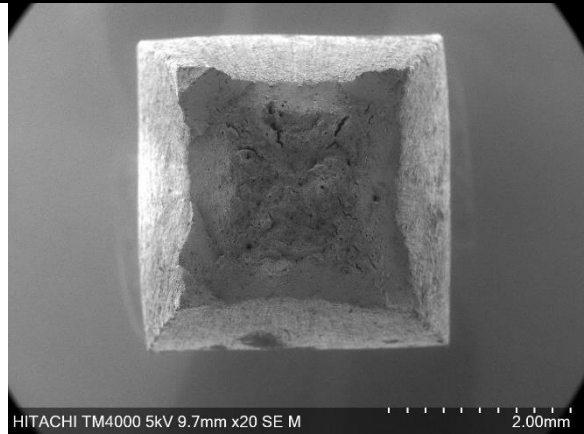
S3 test specimen fracture surface electron microscopic images
